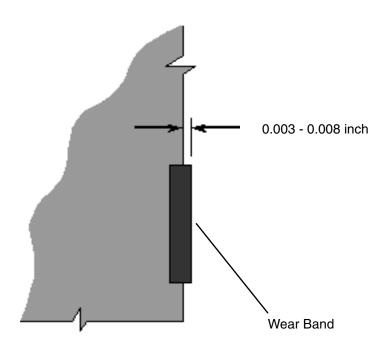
Wear Band Protrusion Dimensions (0.003-0.008 inch)
